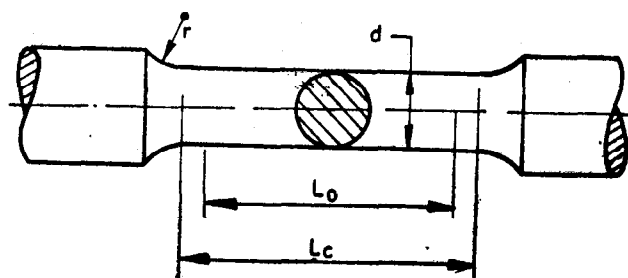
TEST SAMPLE OF CIRCULAR CROSS-SECTION
